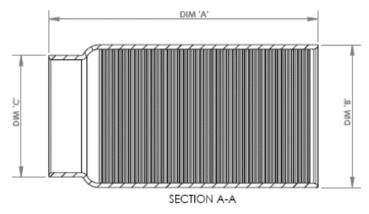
Crimp Sleeve Cross-Section and Dimensions
